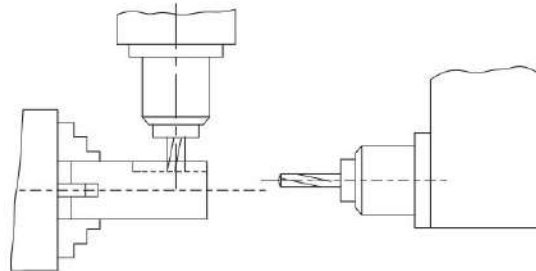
Machining of a keyway or drill a hole away from the centre of the workpiece
